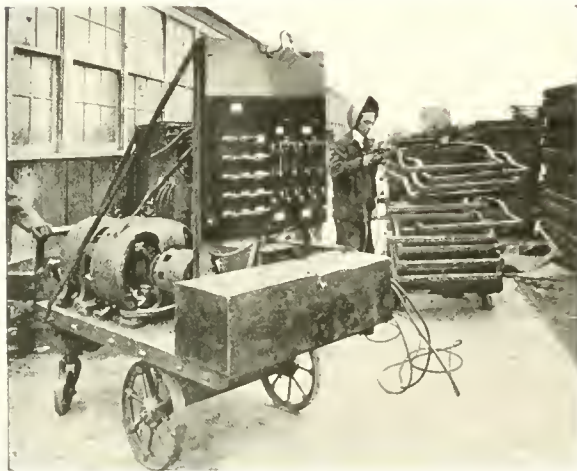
Arc Welding can be applied anywhere that electric current is available and a cable can be carried. This is the most convenient method of welding.
